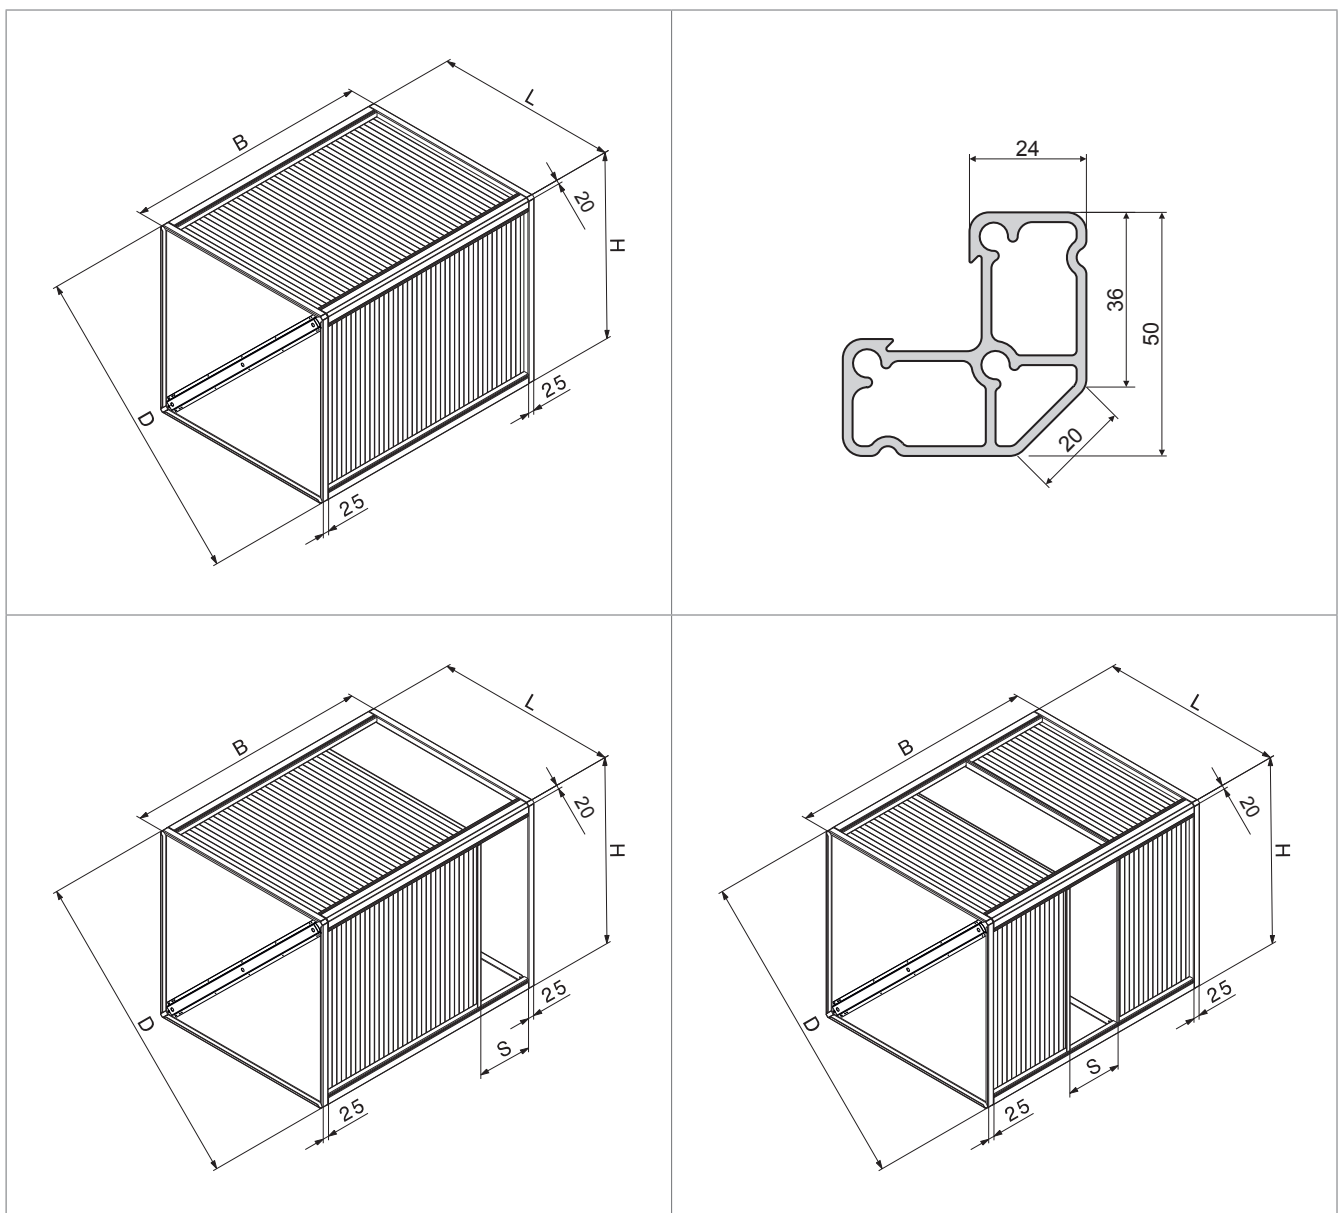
Dimension sheet for design F plate heat exchanger without dampers (dimensions in mm)
